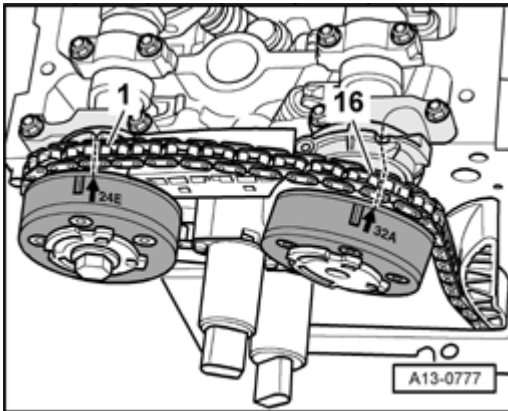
Counting 16 Rollers Of Timing Chain Starting From Inscription "24E" On Camshaft Adjuster (Intake Side) Moving Toward Exhaust Side
